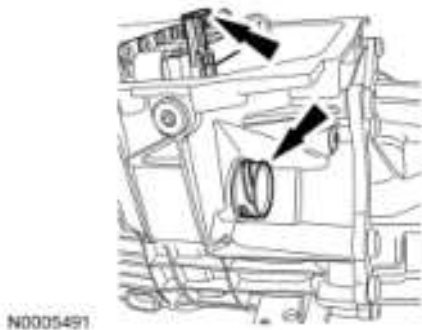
Locating Outer Shell Of Bulkhead Electrical Connector And Release Tab
